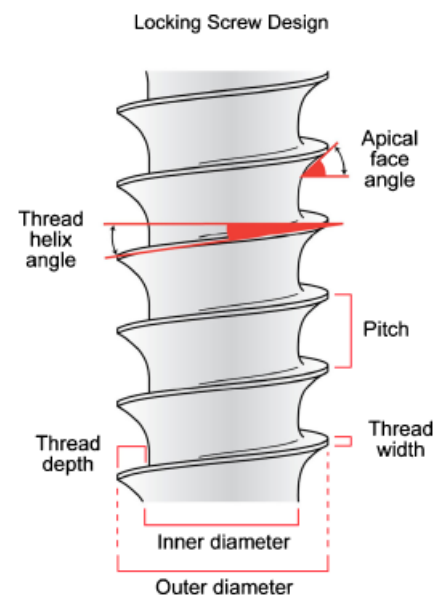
Basic implant macrodesign features: face angle, thread helix, thread pitch, thread depth, thread width and inner and outer implant diameter.
